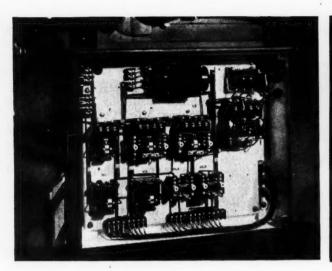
Control Equipment of Brown & Sharpe Grinding Machine Shown in Fig. 1
